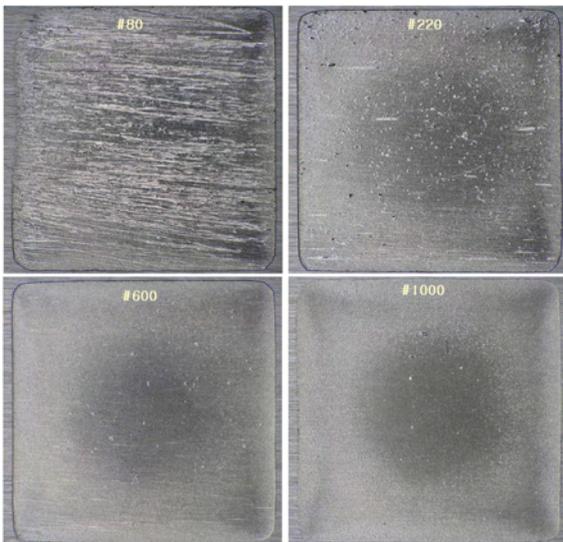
Photograph of electro discharge machined surfaces (without planetary motion of electrode)
